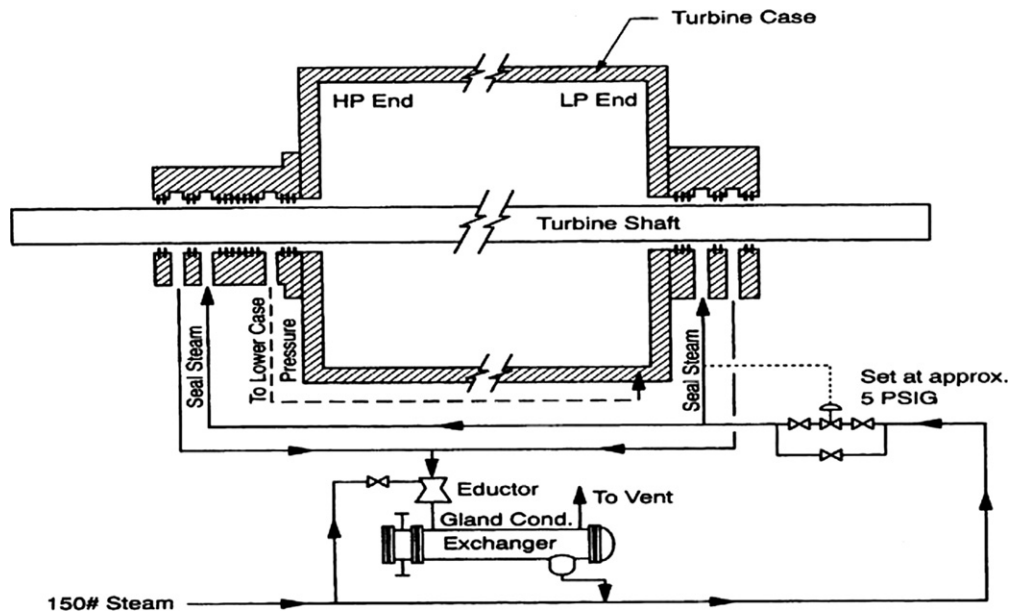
• Steam turbine gland seal system (Courtesy of M.E. Crane, Consultant)
